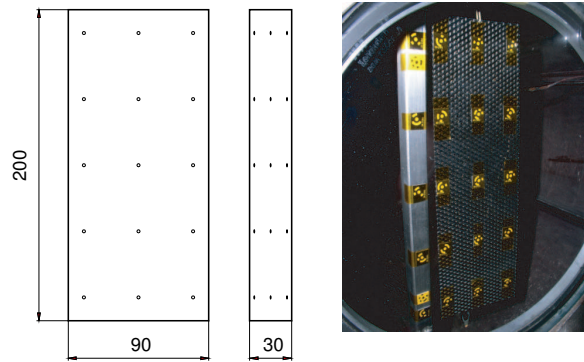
Specimen sizes and location of target points for thermal distortion tests (dimensions in mm).
